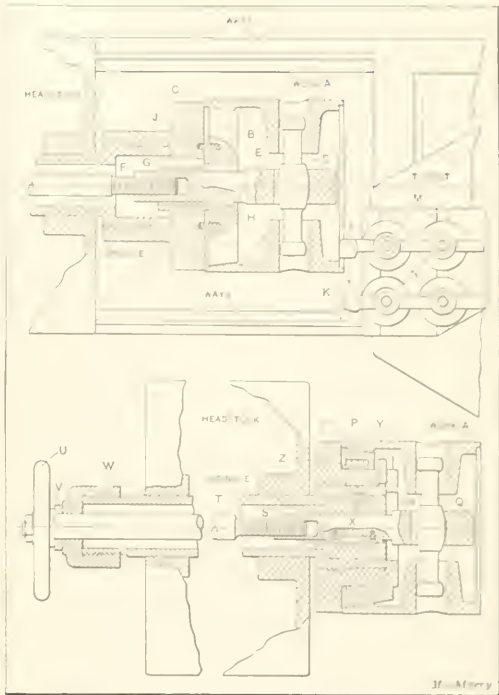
Fixture for holding Pump Piston, and Later Design which avoids Excessive Overhang from Lathe Spindles
